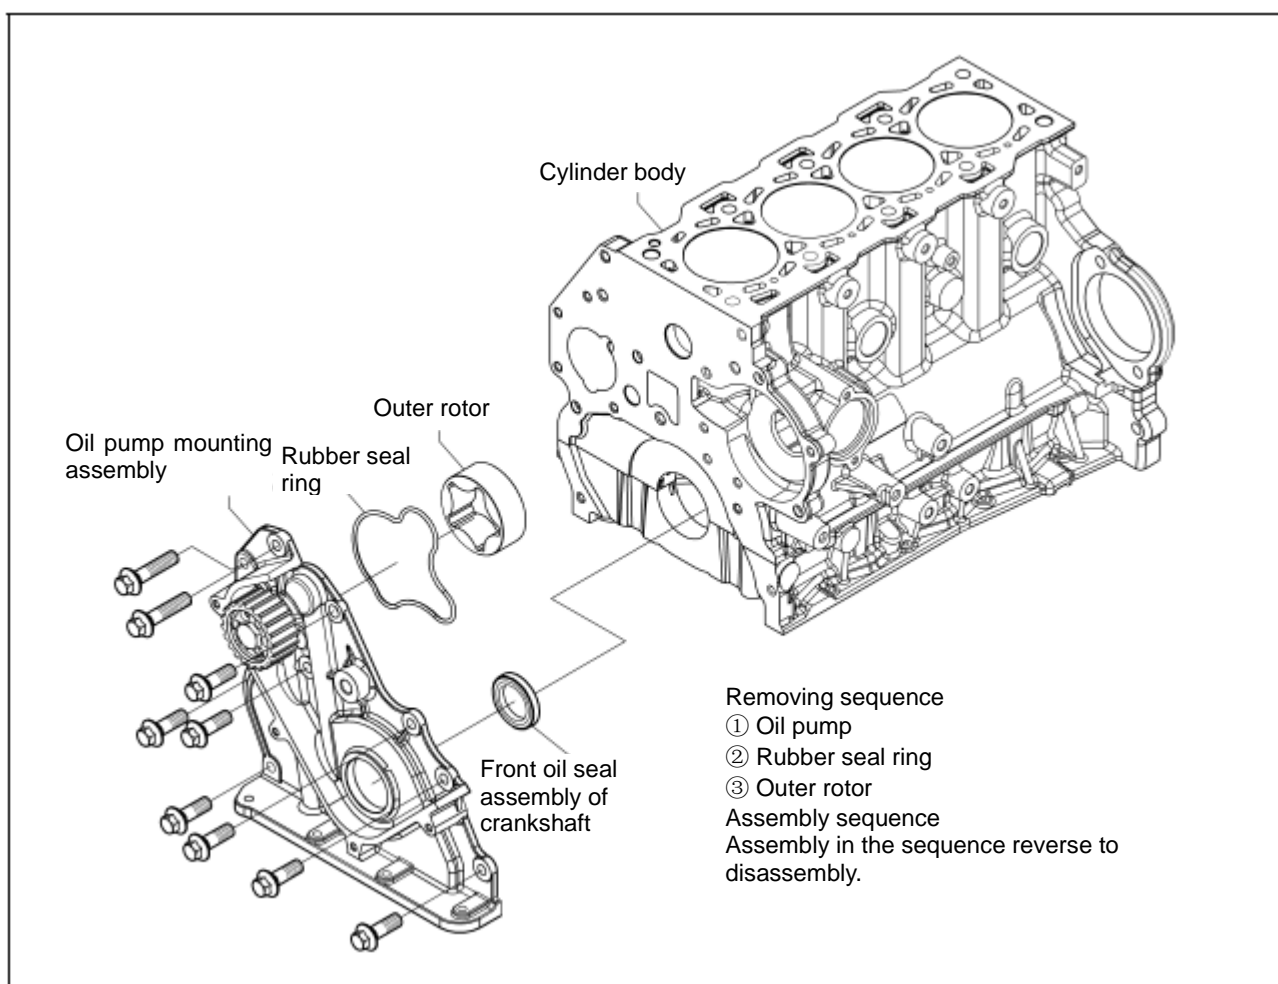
Disassembly / Assembly Schematic Diagram for Oil Pump Parts
